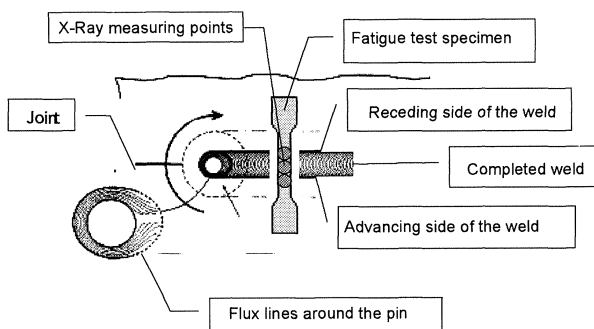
Representation of the stirring and forging action of the FSW tool (top view), fatigue test specimen and X-ray measuring points, 1, 2 and 3 from the advancing to the receding side of the weld.
